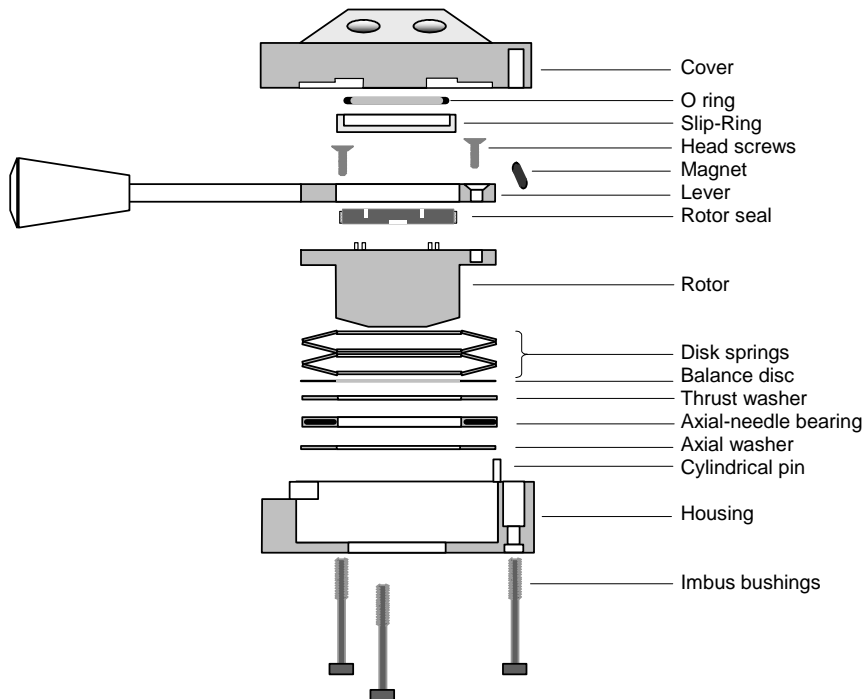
Manually operated 6-Port-3-Channel Valve, exploded view
